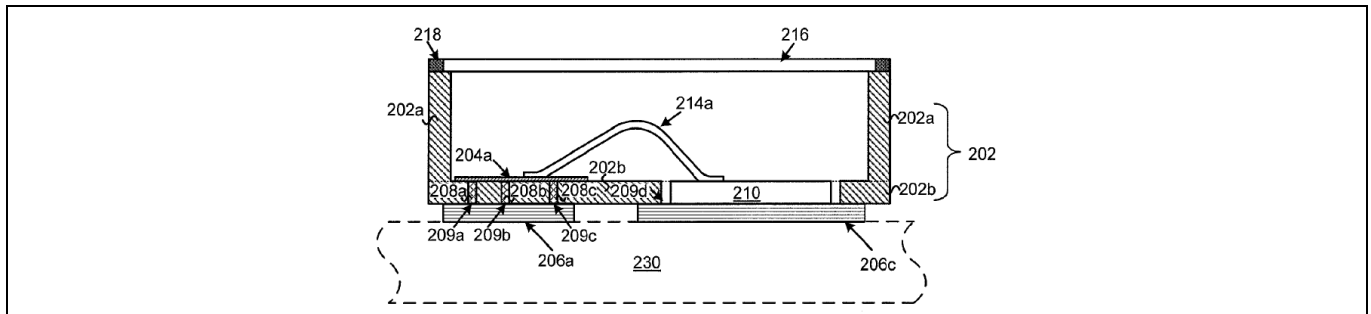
SMD-0.2e, a new design concept (cutaway view showing the chip and wirebond inside)
